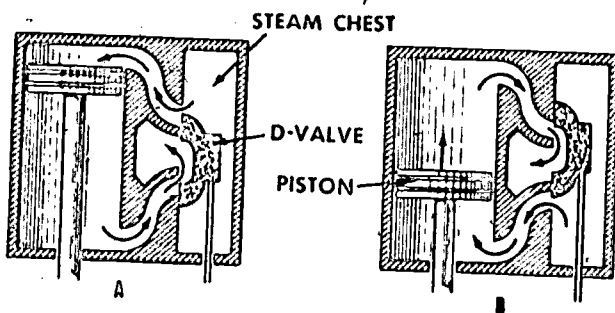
C.-Operating principle of D-shaped slide valve of a reciprocating pump.
